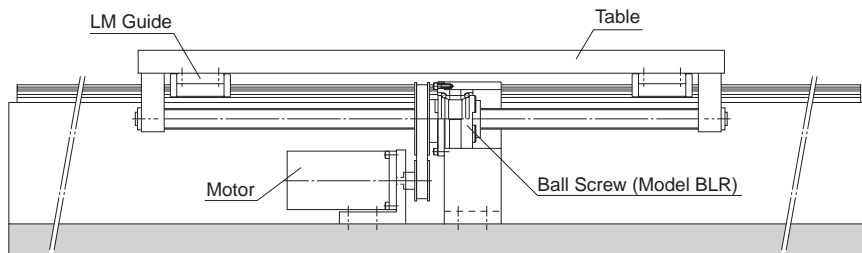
Example of Installation on the Table (Ball Screw Nut Fixed)
